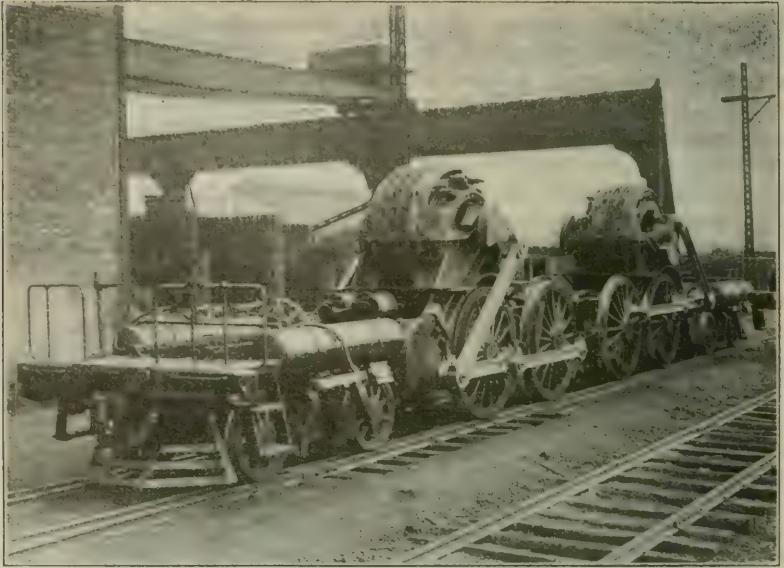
Pennsylvania R. R. Tunnel Locomotive (Cab Removed), Showing Mechanical Parts and Side Rods.
